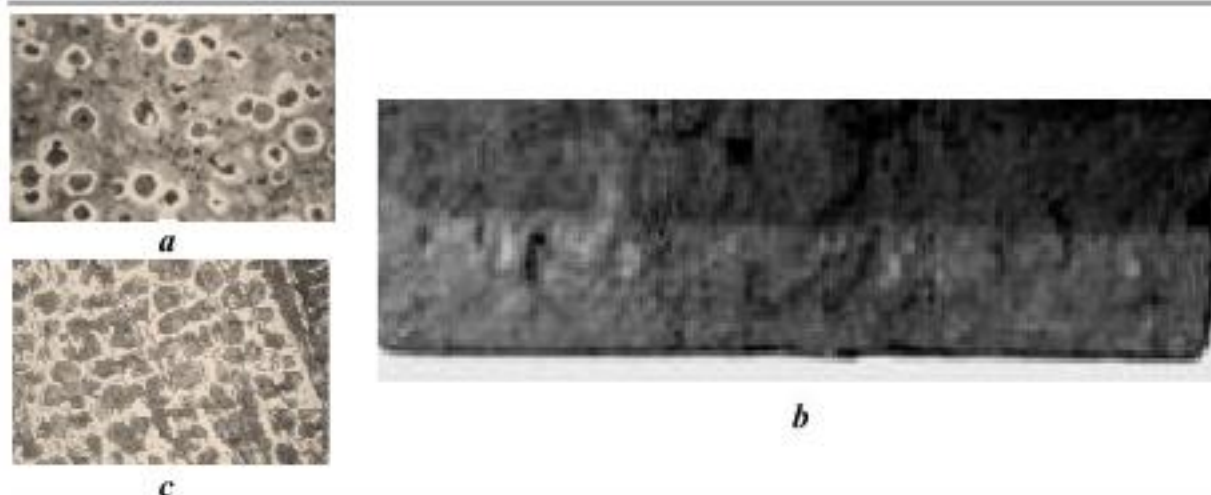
Fracture (b) and microstructure of the upper (a) and lower (c) parts of bi-layer casting
